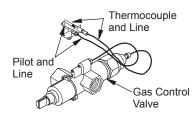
Gas Control Valve with Thermocouple and Pilot
